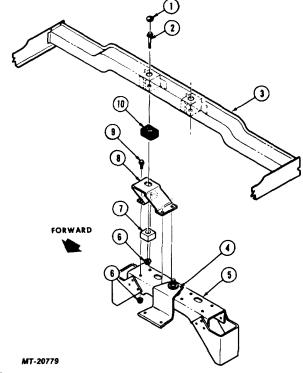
Cap Front Mounting Bracket (Left Front View)
